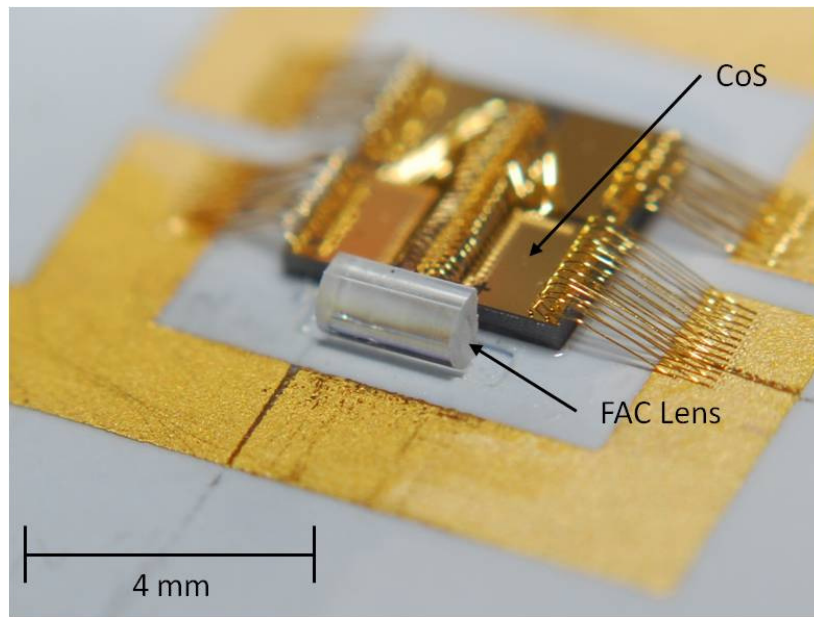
FAC lens bonded to the LTCC cooler using a UV adhesive
